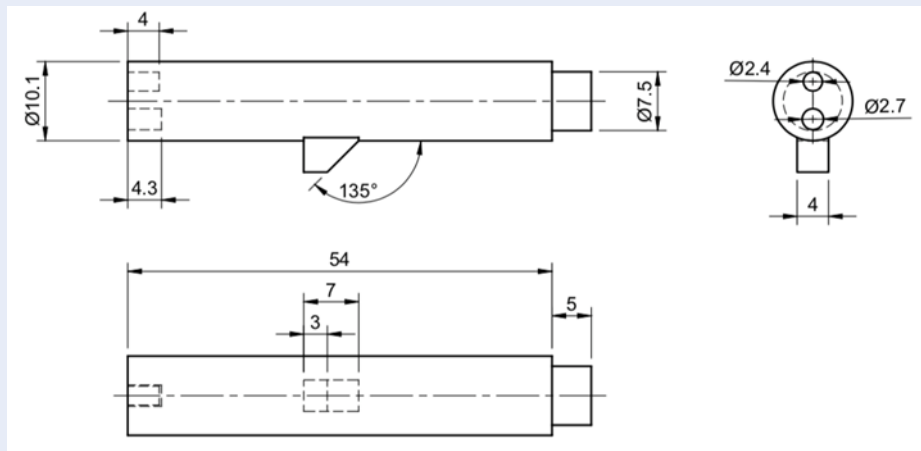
Front, Top, and Side views 2D design with detailed dimensions of the latch. The main arm's cylindrical diameter is 10.1 mm, total length is 59 mm.
